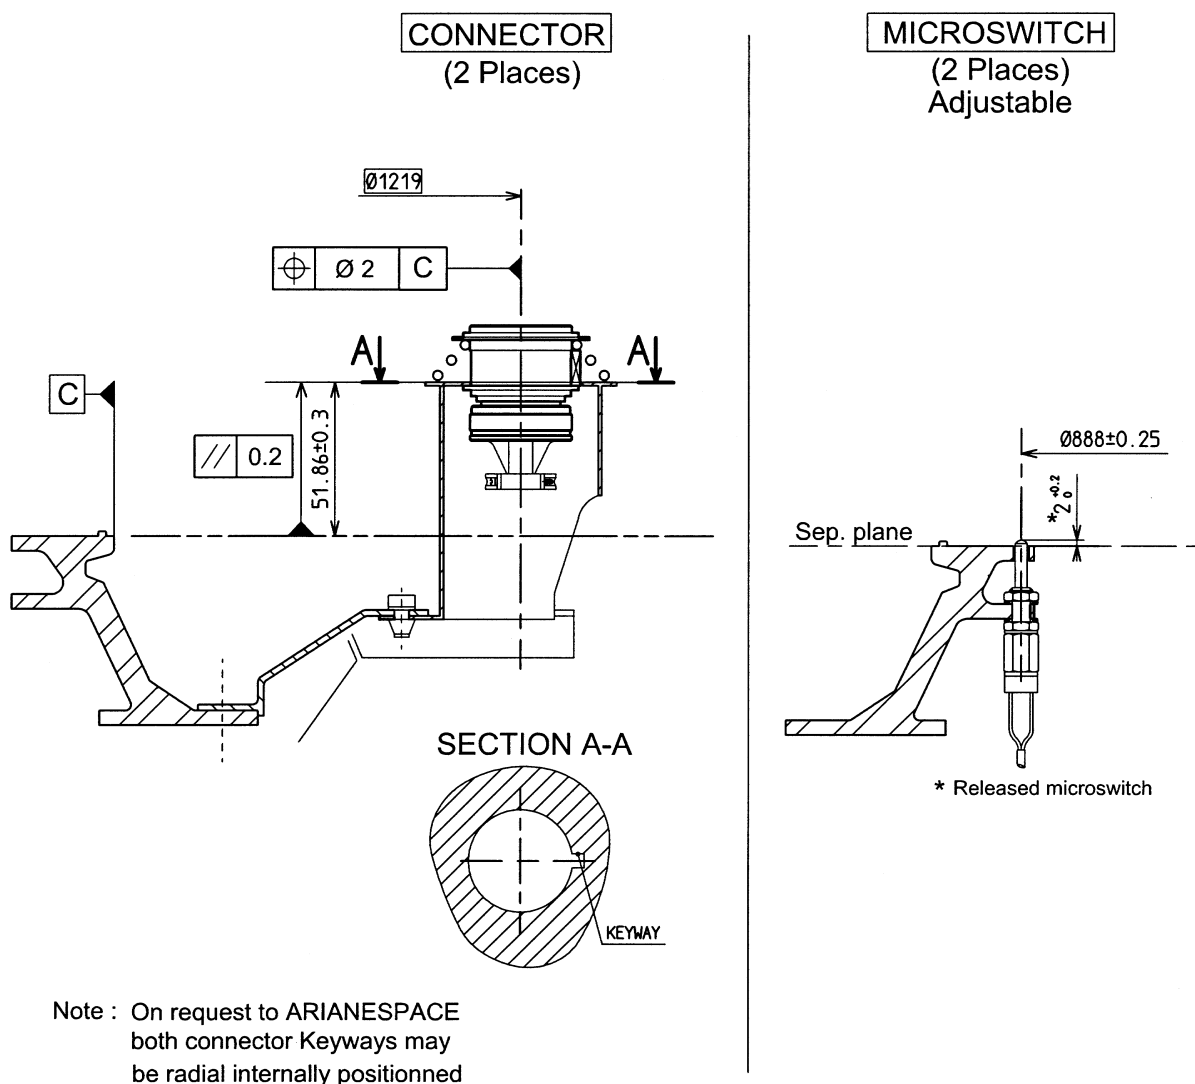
Adaptor 937D mechanical interfaces (details)
